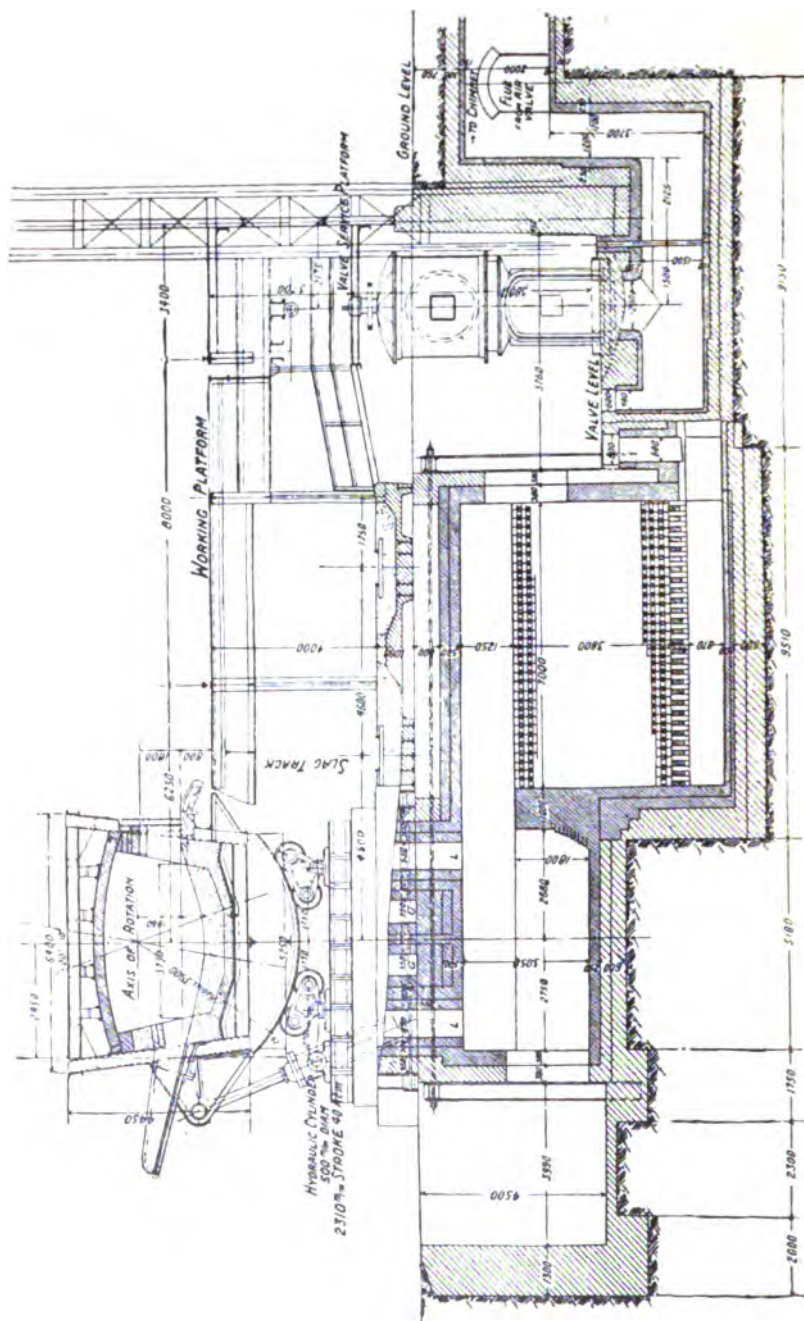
Section through Large Austrian Open-Hearth Furnace
